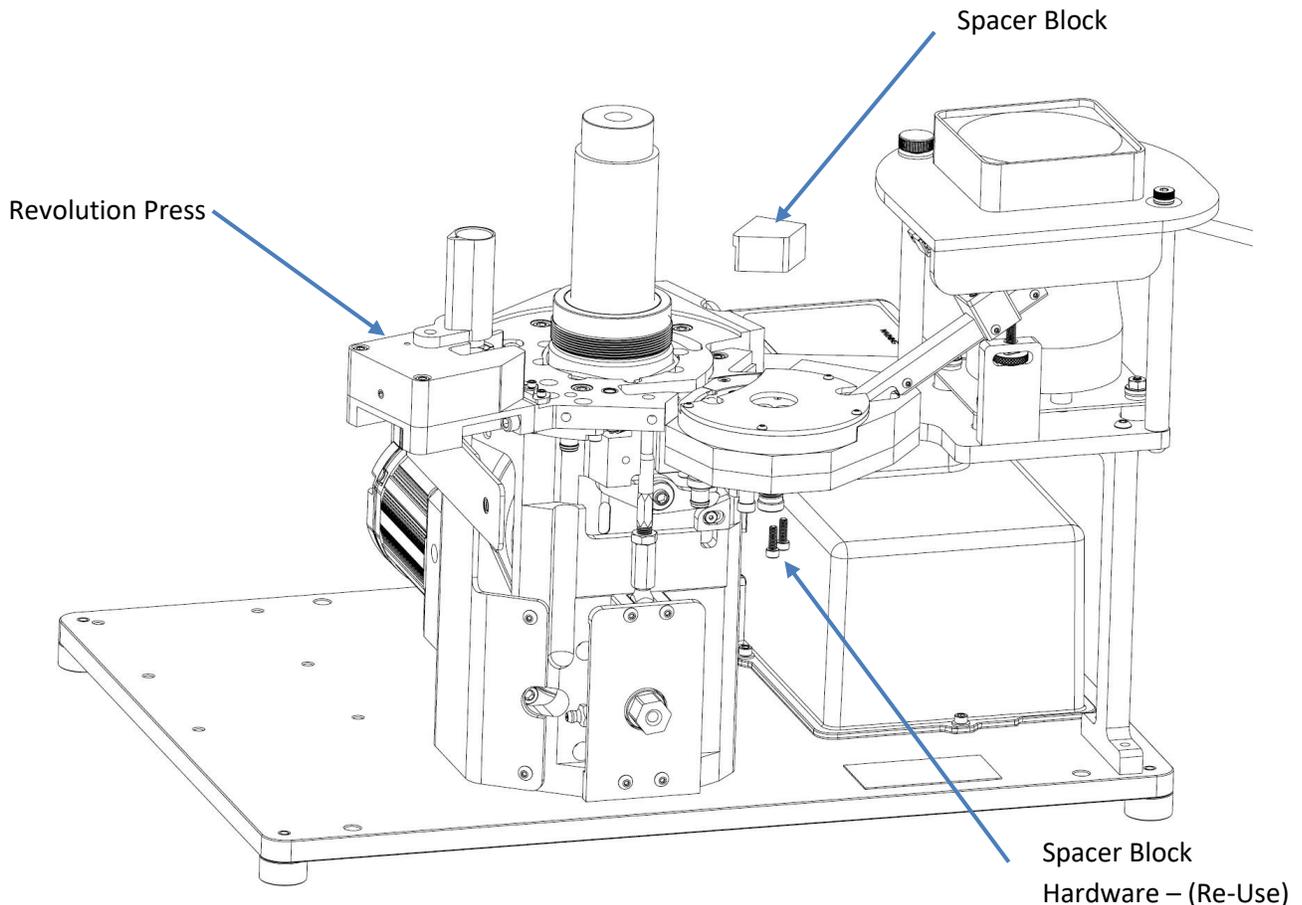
Revolution Press Top End disassembled for Sensor Installation
